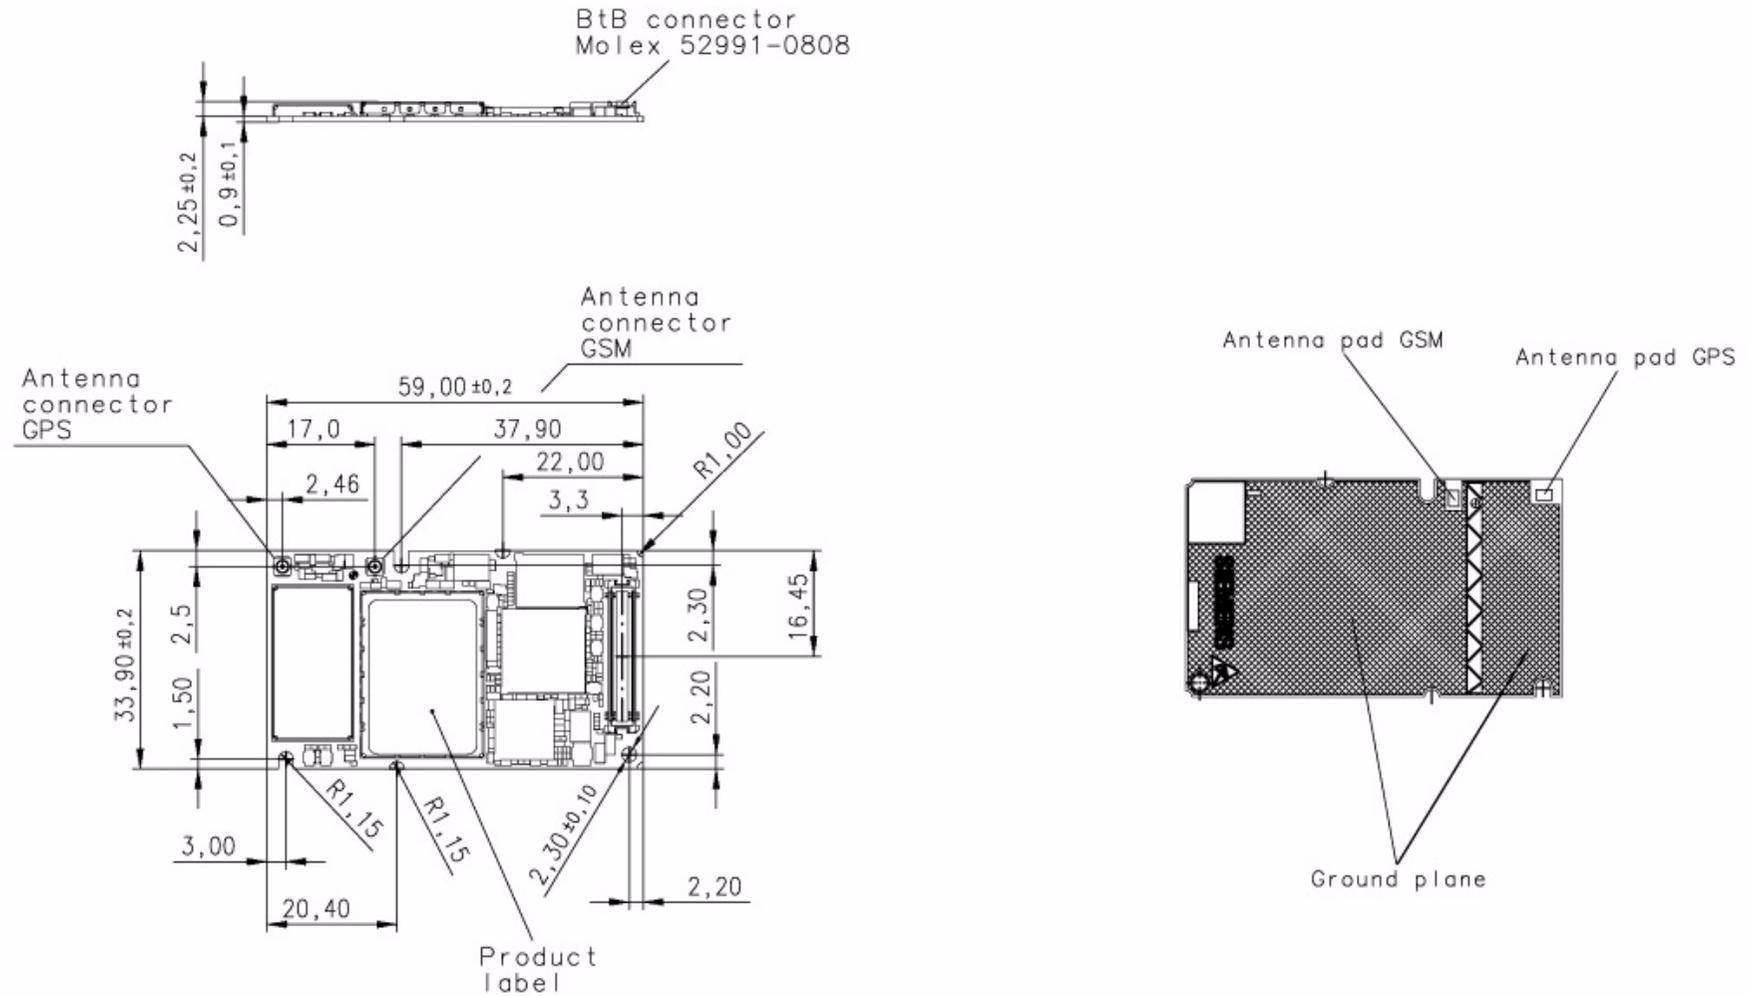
Dimensions of XT65/XT75 (all dimensions in mm)
